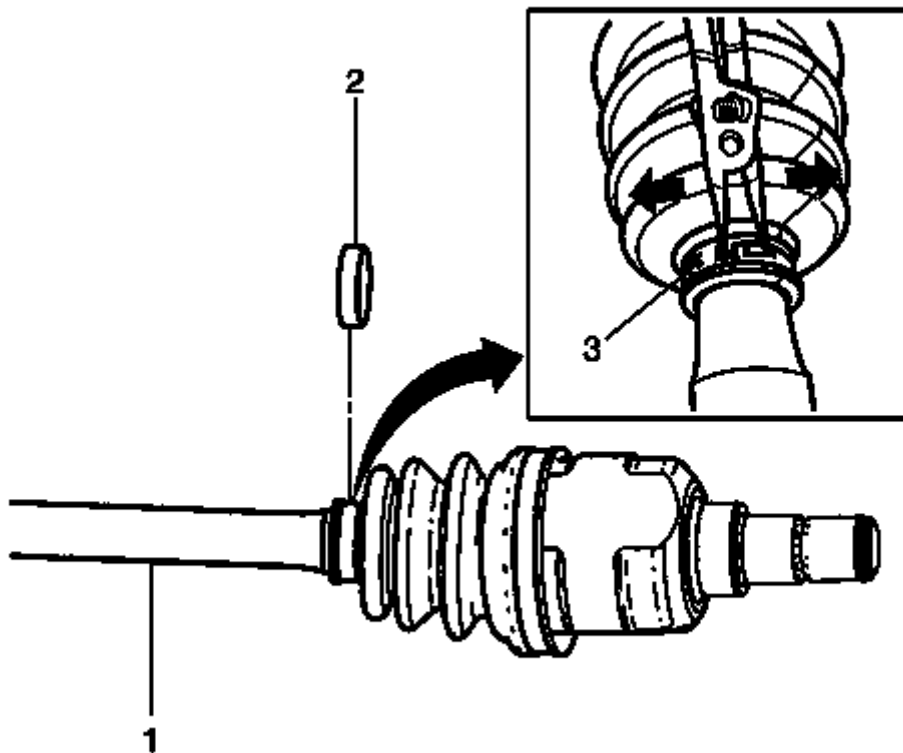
Removing Boot Retaining Clamp Using A Needle-Nose Plier
